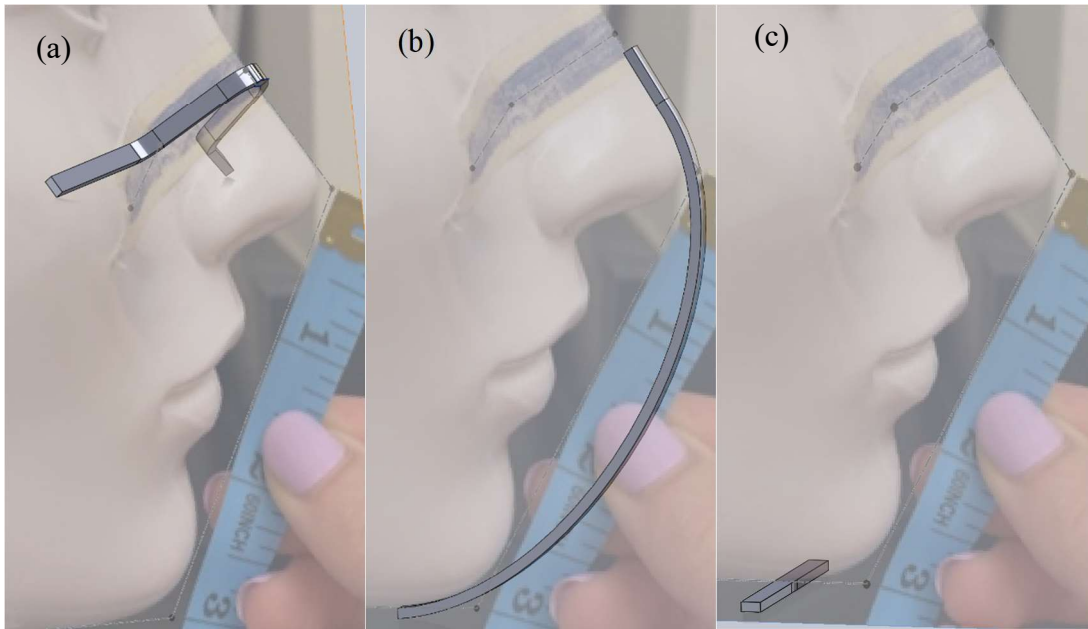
Superimposed images on SolidWorks for brace construction for (a) nosepiece, (b) mouthpiece, and (c) chin section
